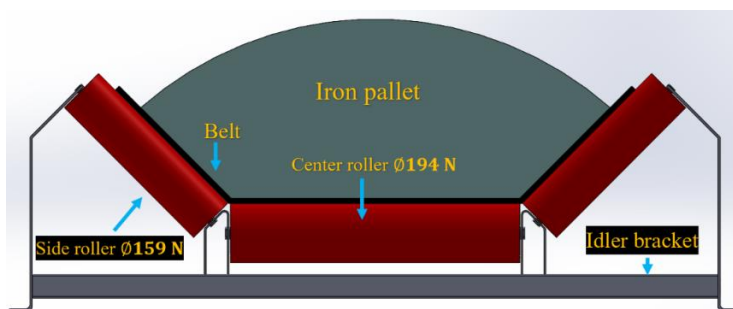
Load carrying configuration for troughed roller assembly-LKAB[14]
